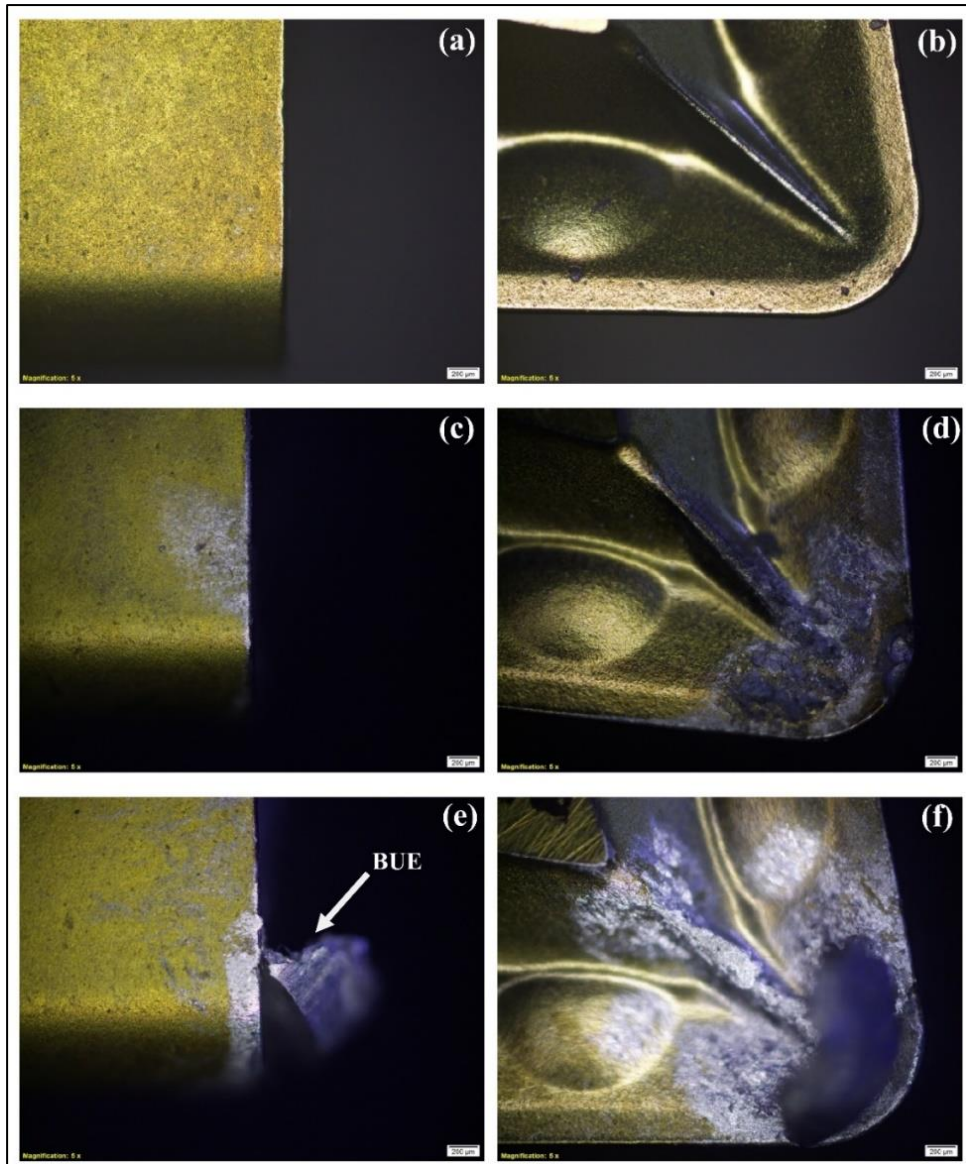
Tool wear morphology for cutting tool (a) flank face before cutting, (b) rake face before cutting, (c) minimum tool wear flank face, (d) minimum tool wear rake face, (e) maximum tool wear flank face, (f) maximum tool wear rake face
